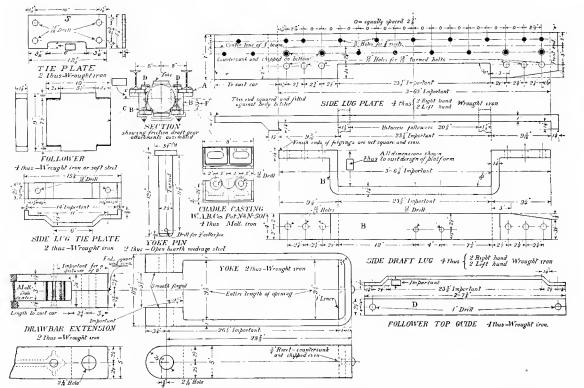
Parts Used in Application of Westinghouse Friction Draft Gear to Passenger Train Cars with Standard Steel Platforms and Three Stem Couplers. Westinghouse Air Brake Company.
